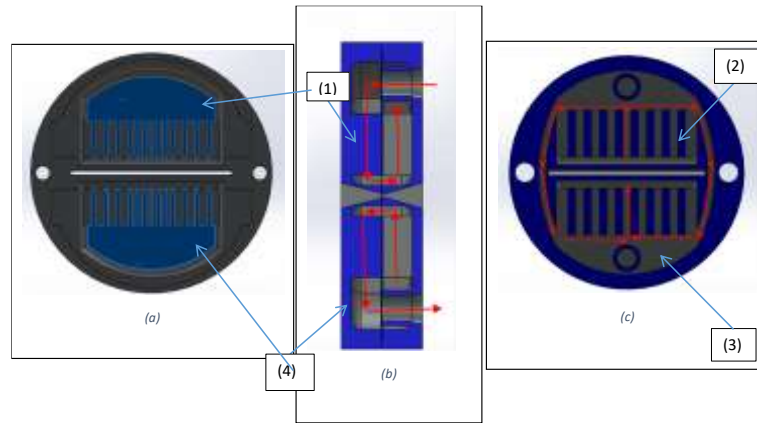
The geometry of cooling mechanism. (a) Protective plate, (b) Side view of the cooling mechanism, (c) Scanner plate view.
